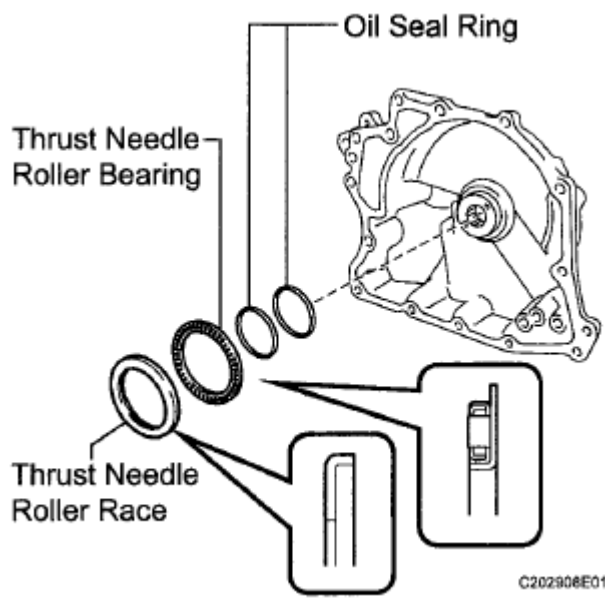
Identifying Oil Seal Ring, Thrust Needle Roller Bearing And Thrust Needle Roller Race
